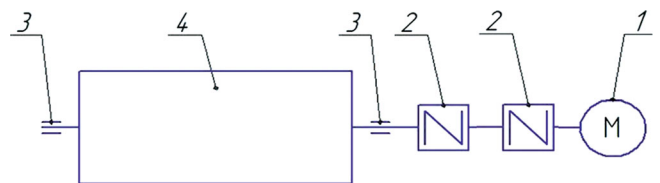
Kinematic scheme of the ball mill drive after reengineering: 1—geared motor; 2—gear couplings; 3—bearing assemblies; 4—mill
